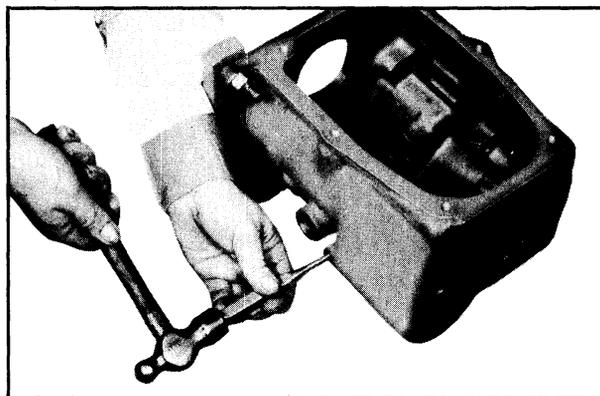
Driving Lock Pin Into Idler Shaft
